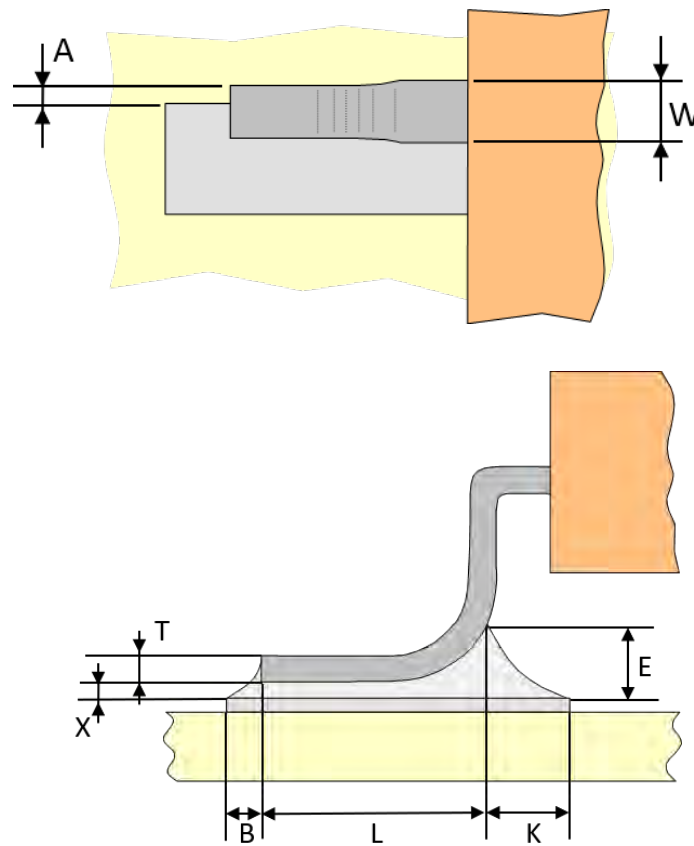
Mounting of gull-wing led components with round, rectangular, ribbon leads
